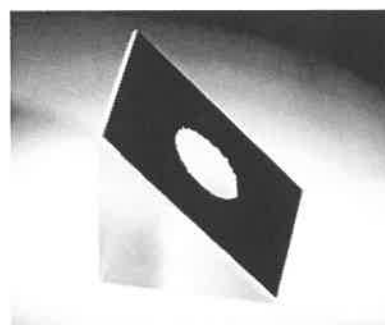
The right angle prism with hole at the center, fabricated using a diamond core drill.
